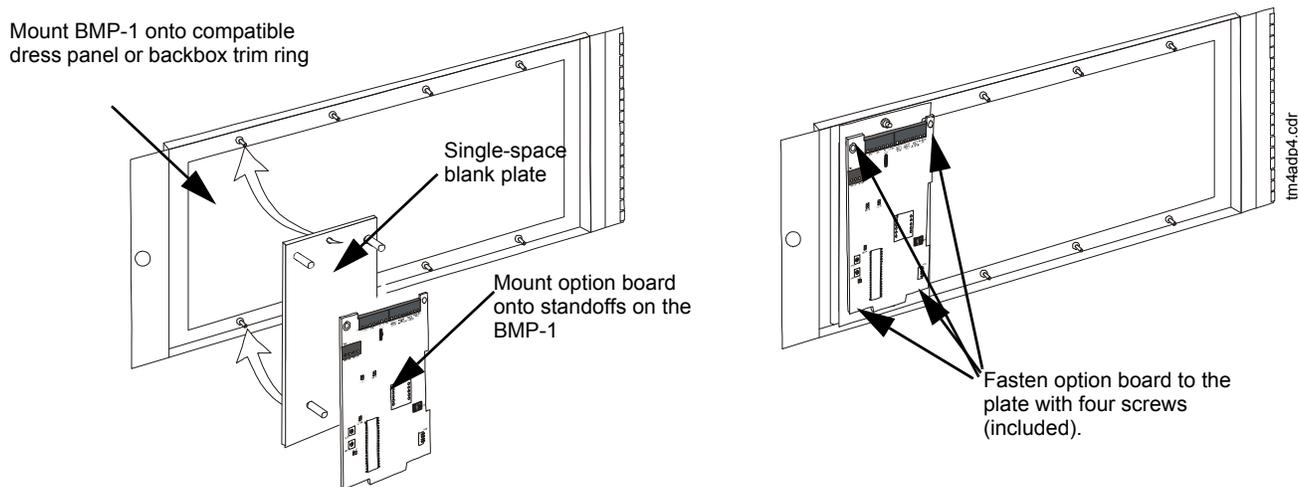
Mounting an Option Board onto a Dress Panel with BMP-1 (ADP-4B Shown)
